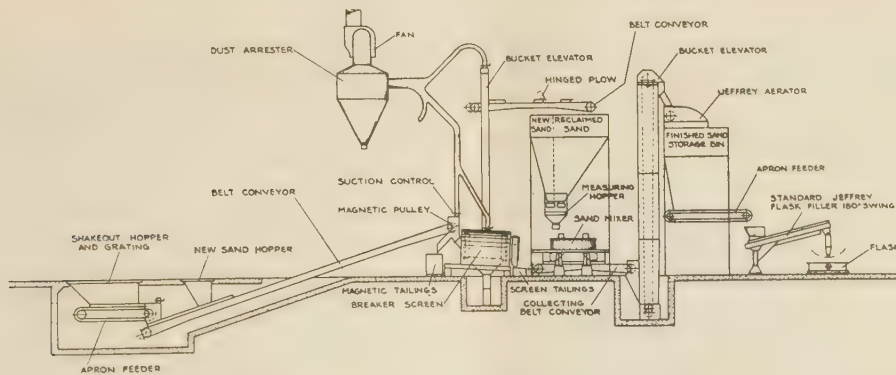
TYPICAL LAYOUT OF STEEL FOUNDRY
